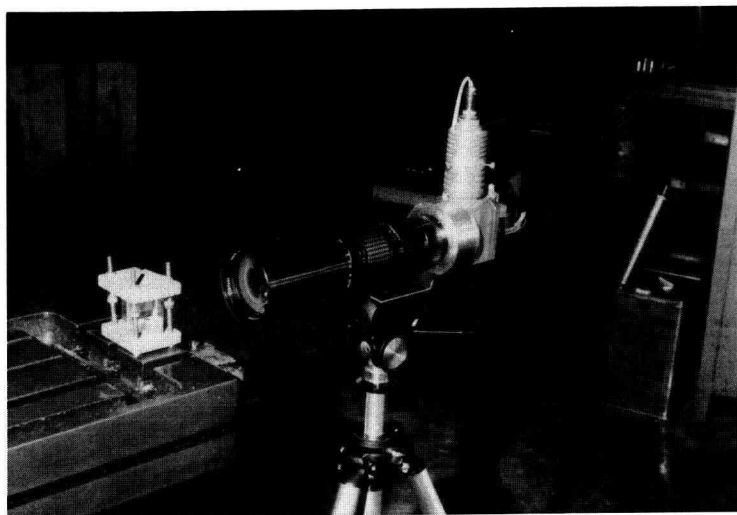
Setup for measuring the angular sag of the milling machine table.
